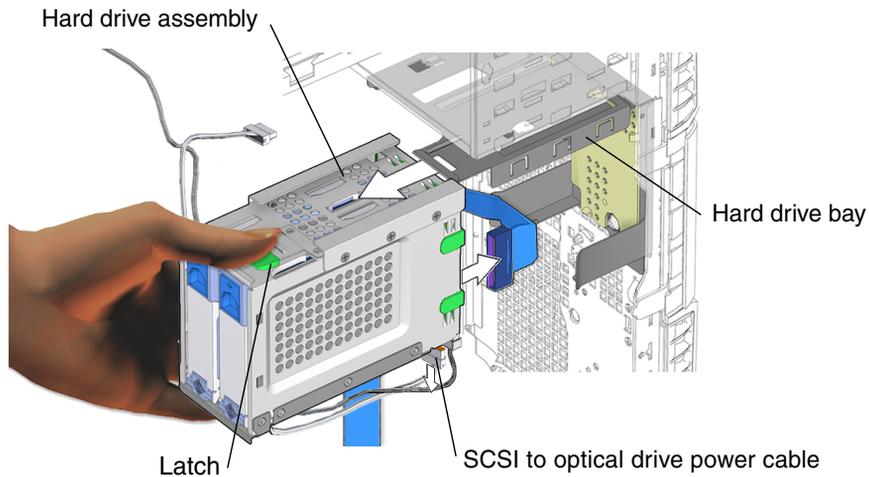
Removing the Hard Drive Bracket Assembly
